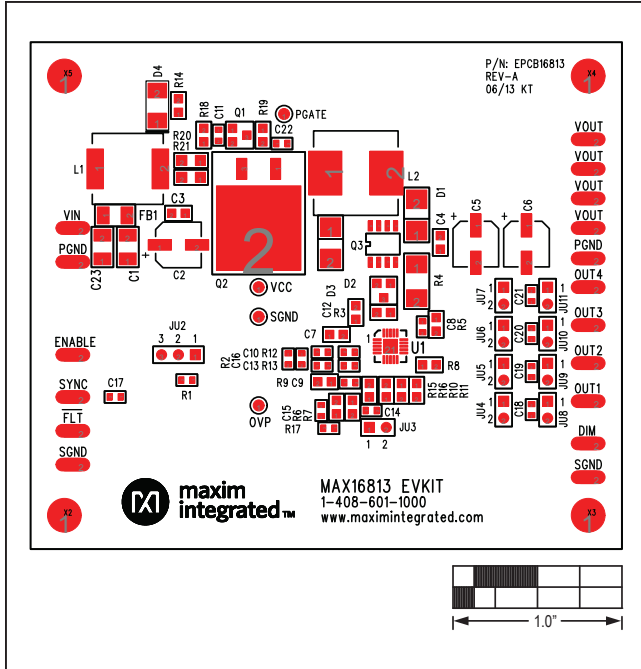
MAX16813 EV Kit Component Placement Guide—Component Side
